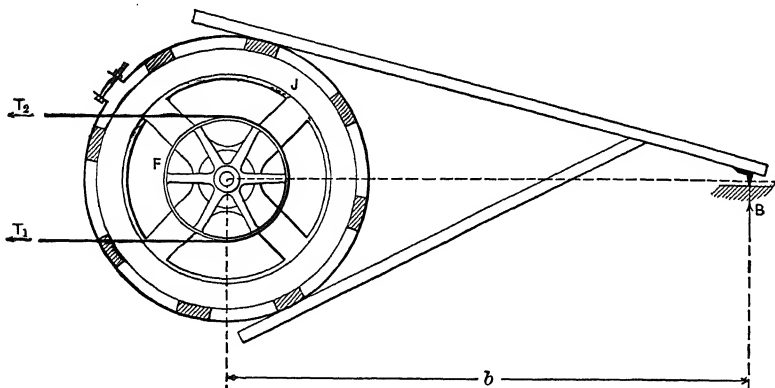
BRAKE CARRIAGE, BELT-TESTING MACHINE.
